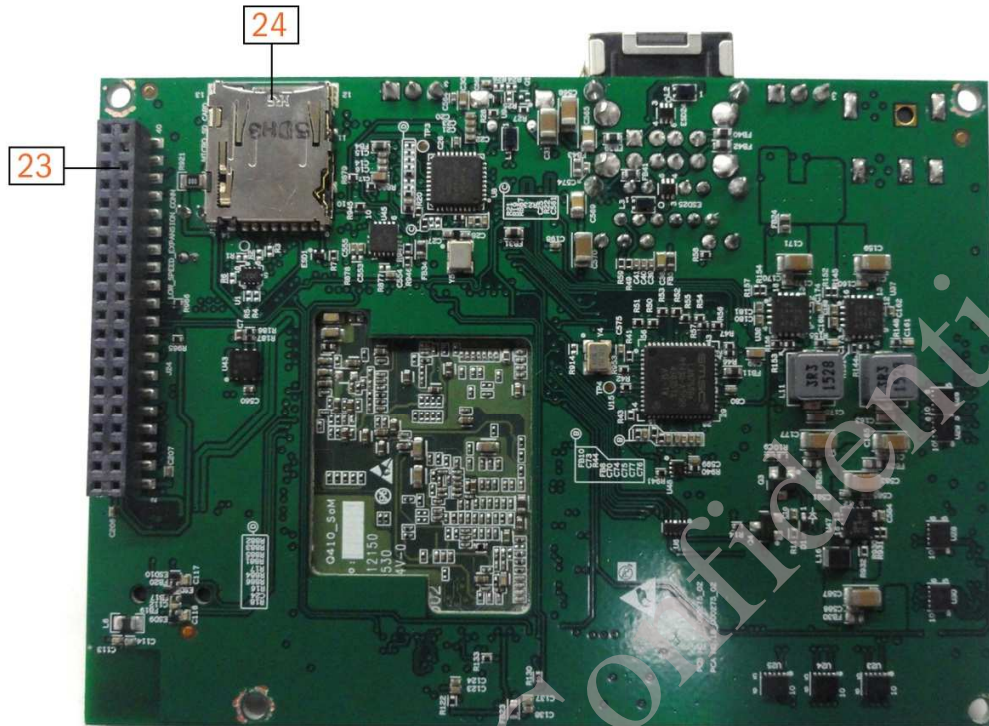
ERAGON410 Bottom View of SOM + Carrier Board
